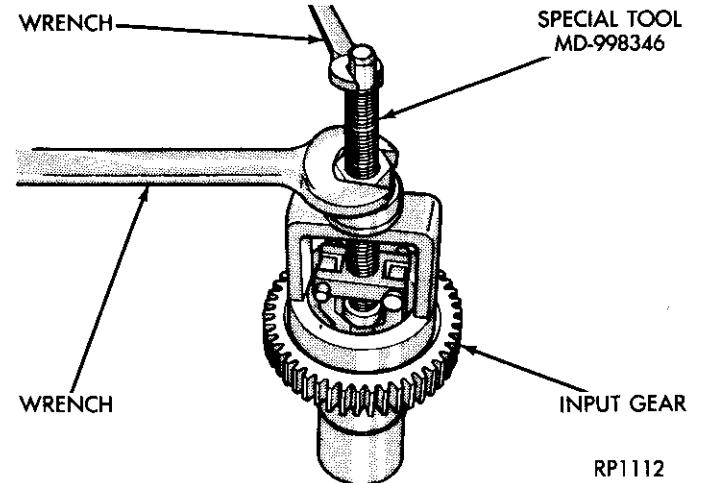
Removing Mainshaft Pilot Bearing From Input Gear
